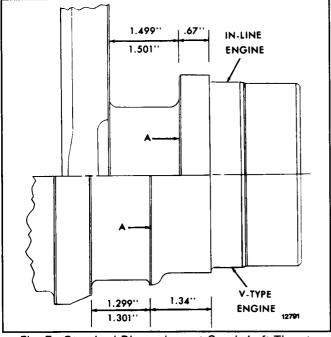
Standard Dimensions at Crankshaft Thrust Surfaces – In-Line and V-Type Engines
